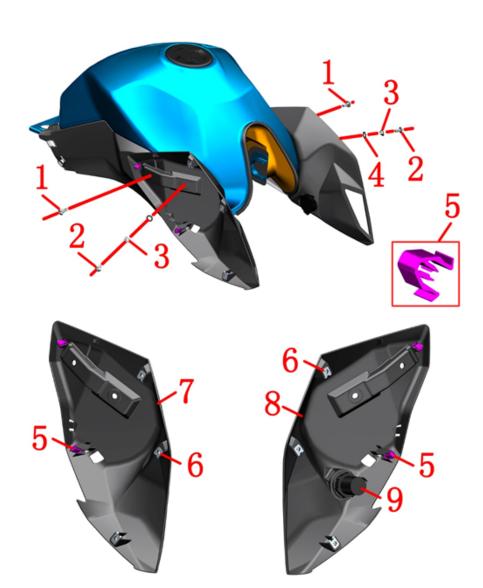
FUEL TANK		Fuel tank cover component 2	CHK	401
